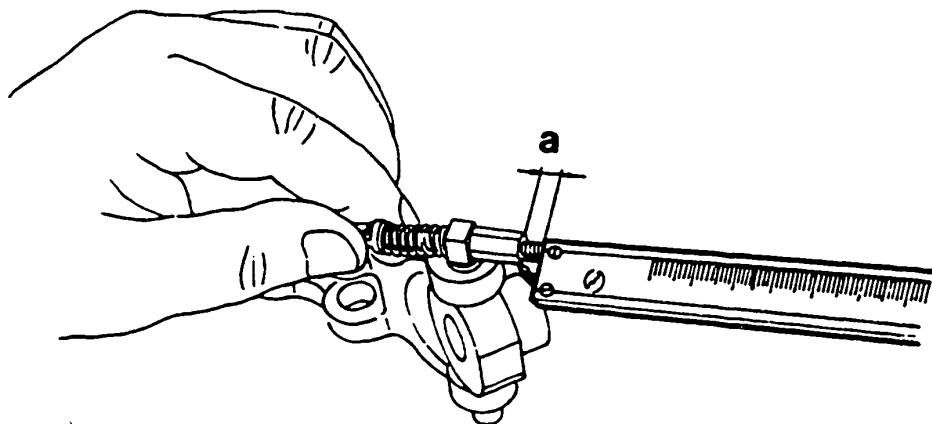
Measuring distance between end of securing screw and end face of adjusting nut
